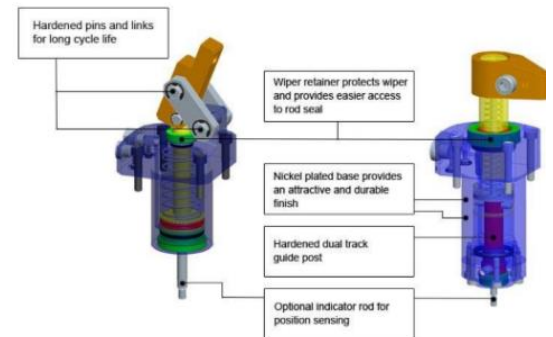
Hydraulic Clamping System used for CNC machines [1]
